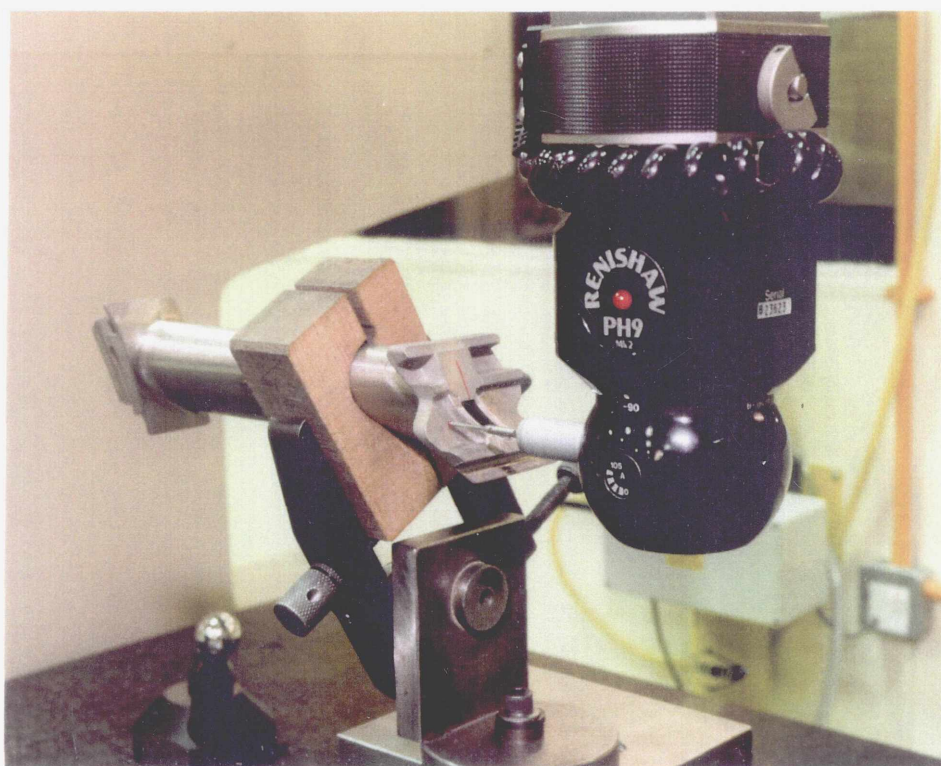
The Renishaw PH9 Motorised Touch Probe Carrier with TP2 Touch Probe
